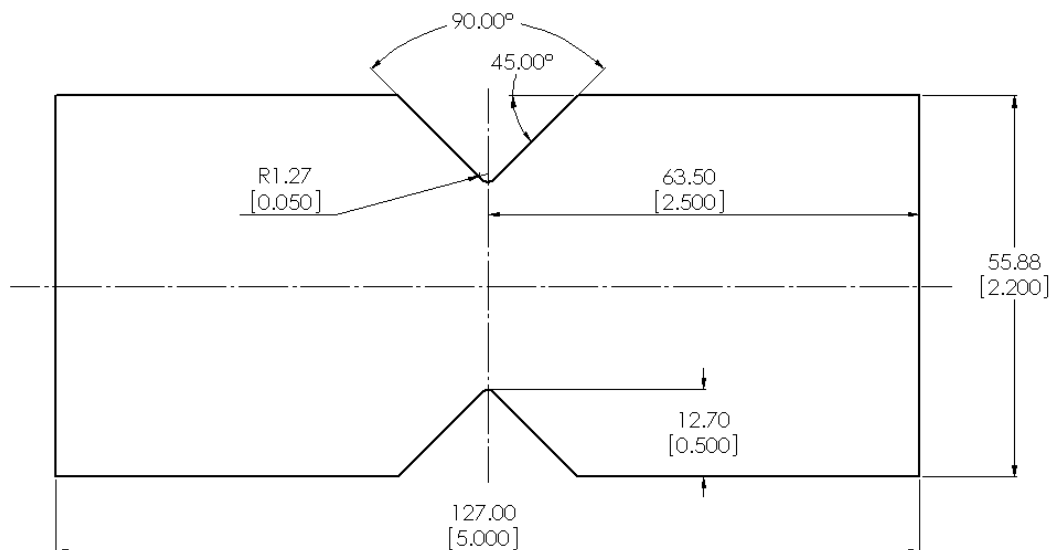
Target dimensions for the Combined Loading Shear specimen in mm [in.].
